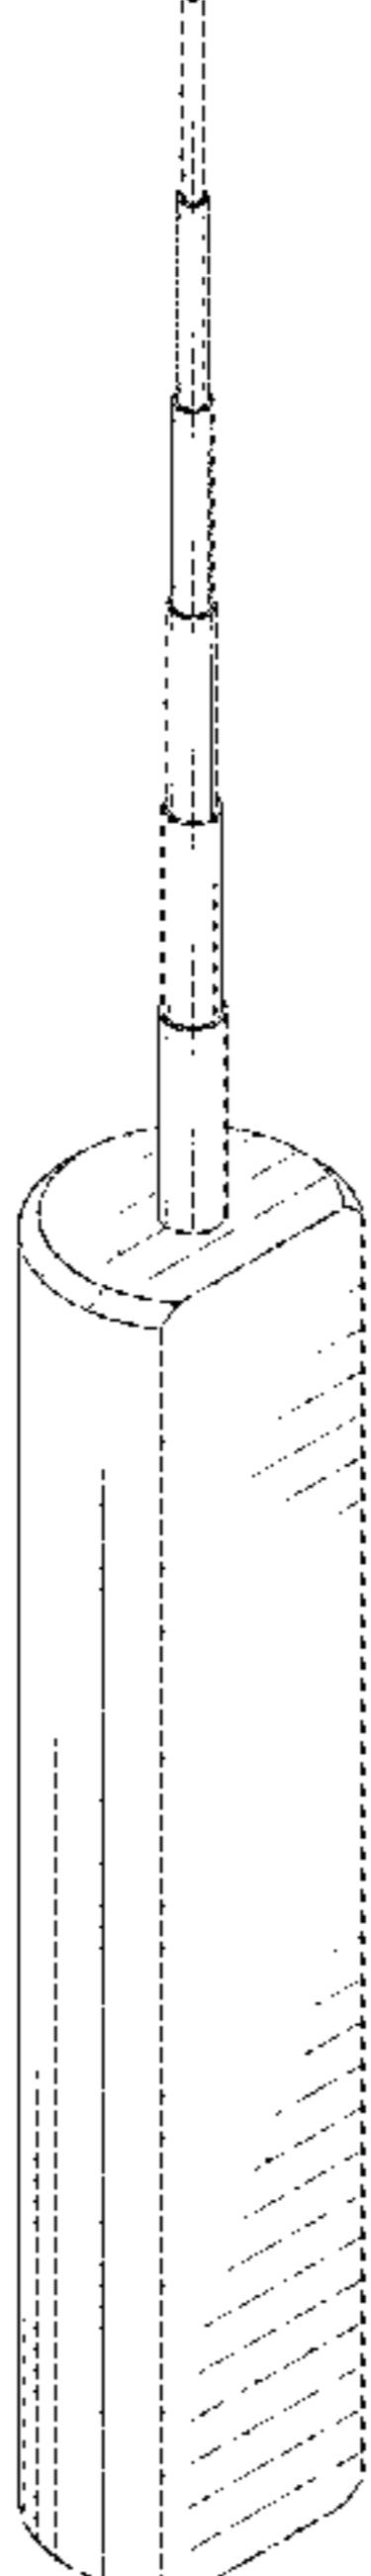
is a right side elevation view of the eyeglass screw hole gauge of FIG. 1;
